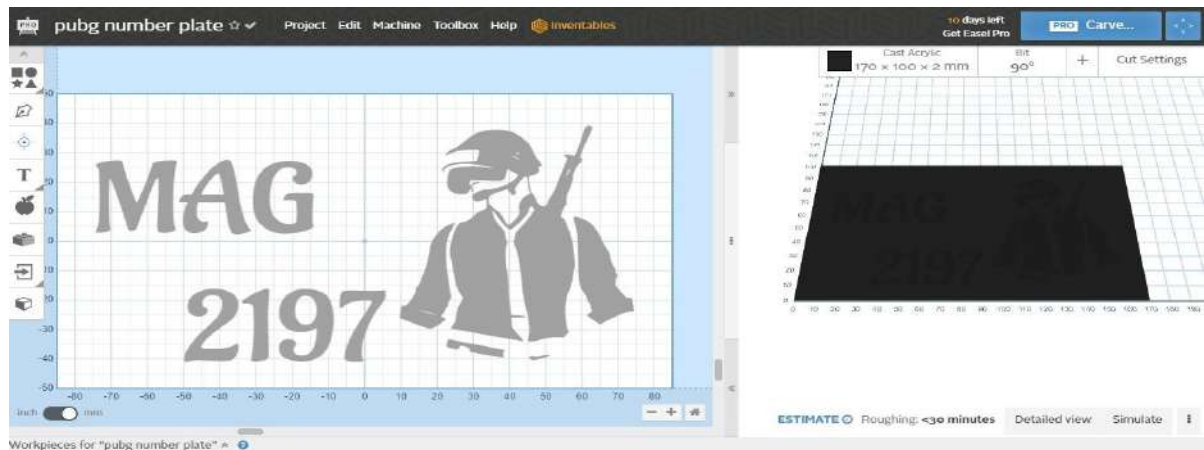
Design a number plate on Acrylic material with CNC machine built on Easel Software
